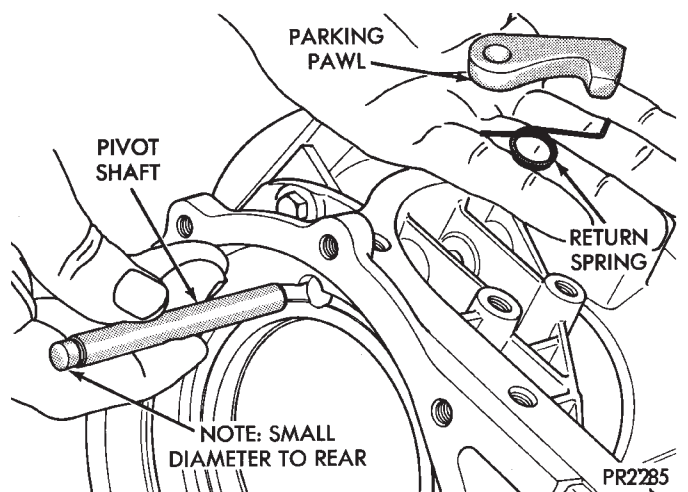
Parking Pawl, Return Spring, and Pivot Shaft
